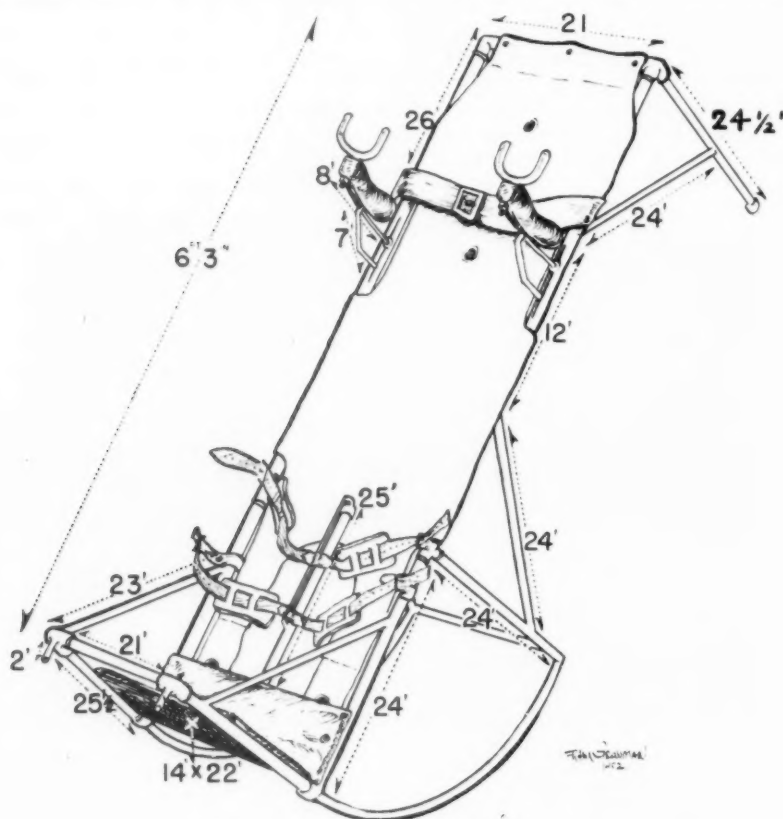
Detailed drawing for fabrication of the Quadriplegic Standing Frame.
